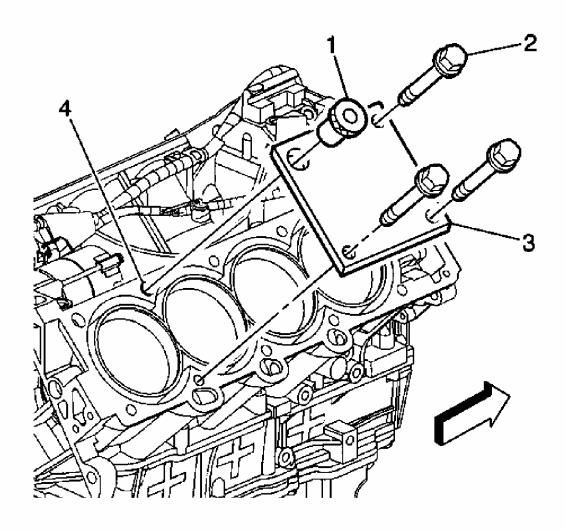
View Of Fixture Plate, Bushing & Bolts - Inboard Courtesy of GENERAL MOTORS CORP.
